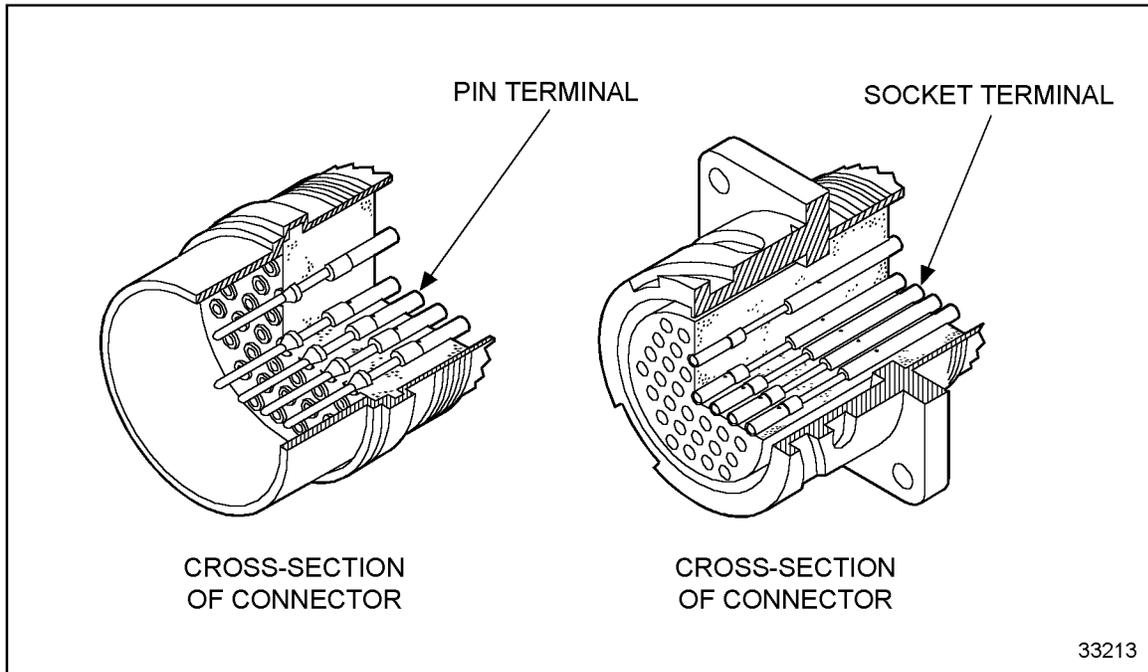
Connector Cross-section With Pin and Socket Terminals
